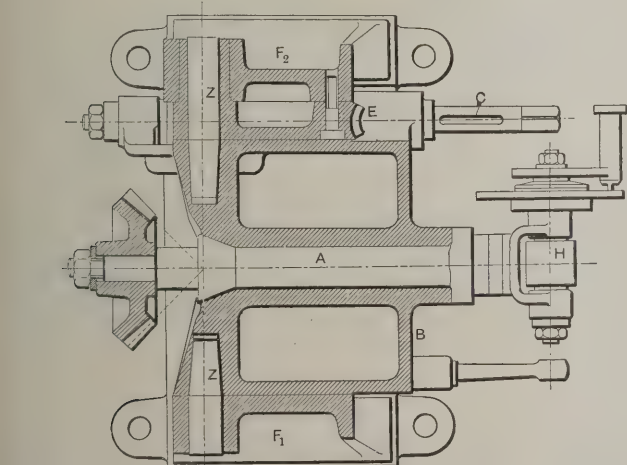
Horizontal Section and Plan of Bevel Gear Shaping Attachment.
